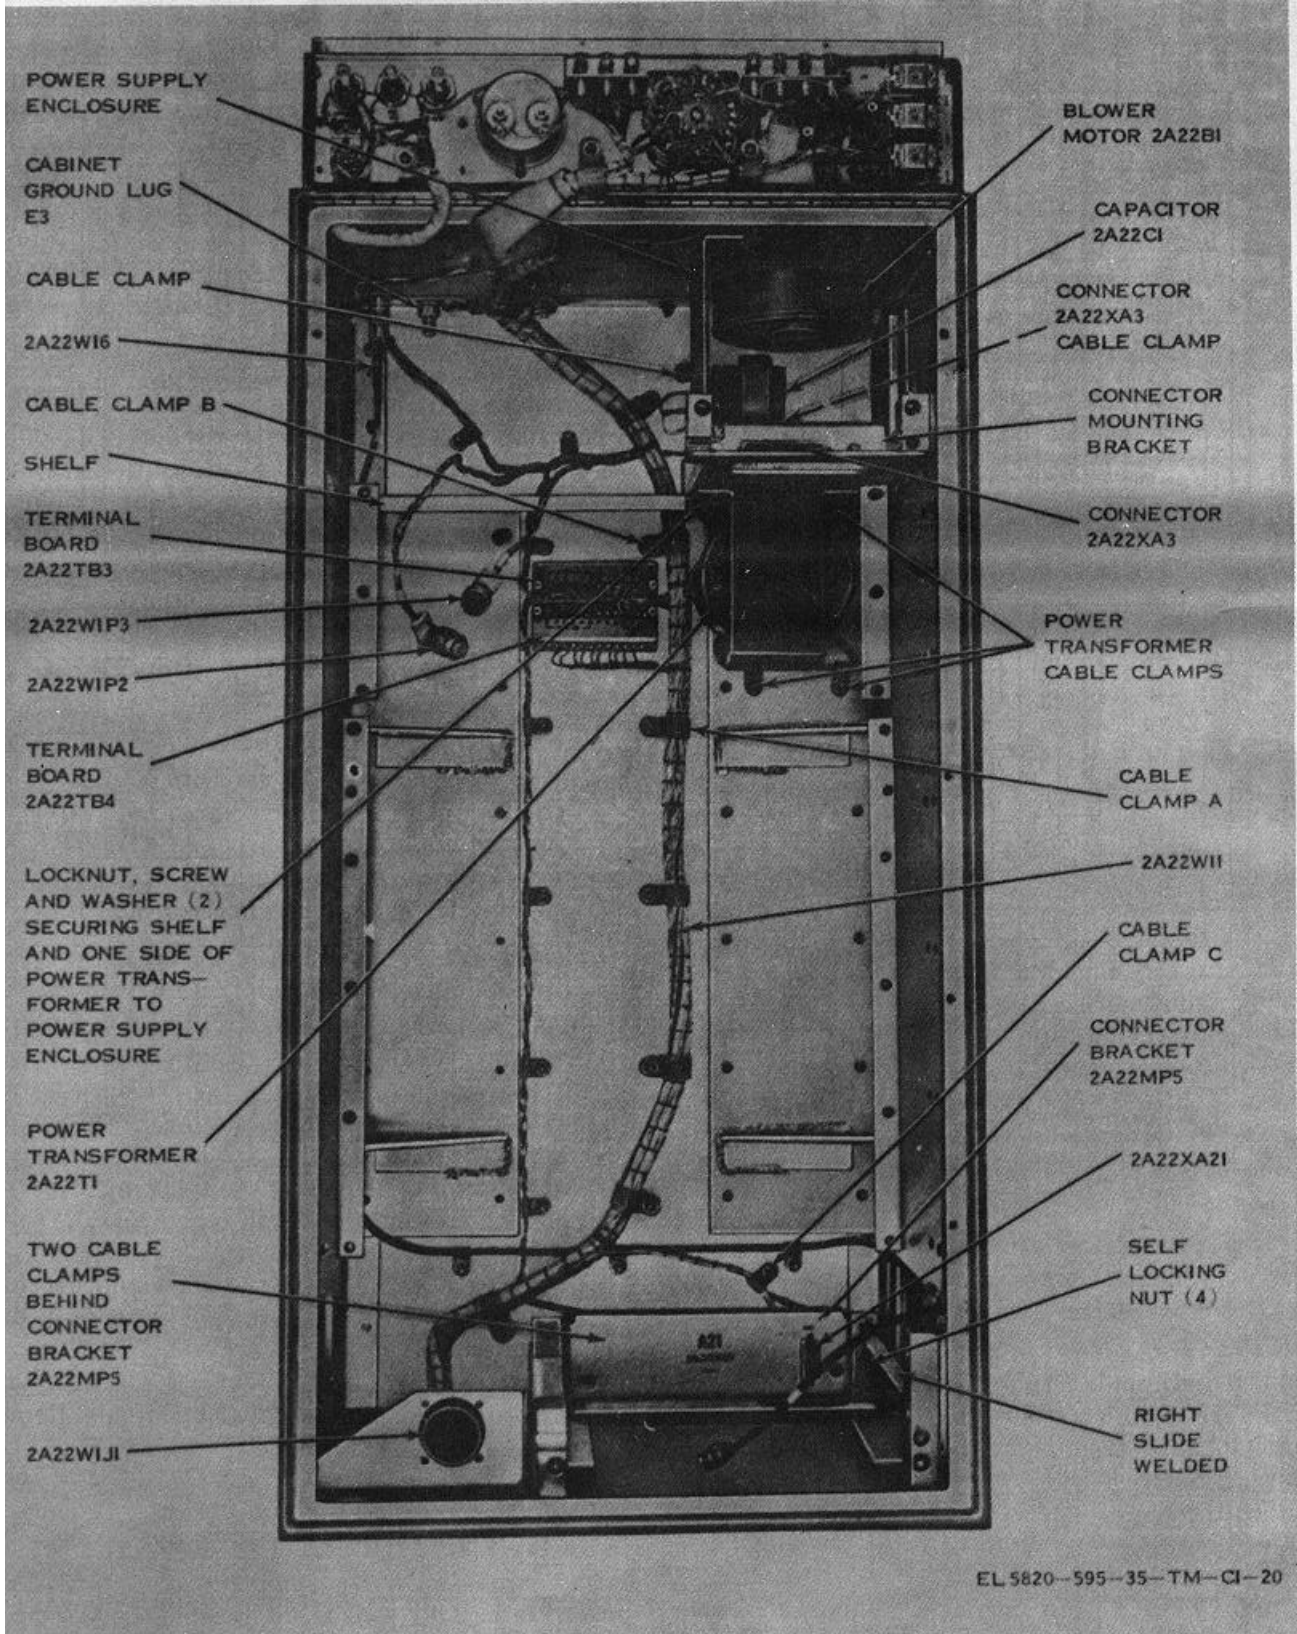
Receiver cabinet 2A122, front view, partially disassembled, parts location.
